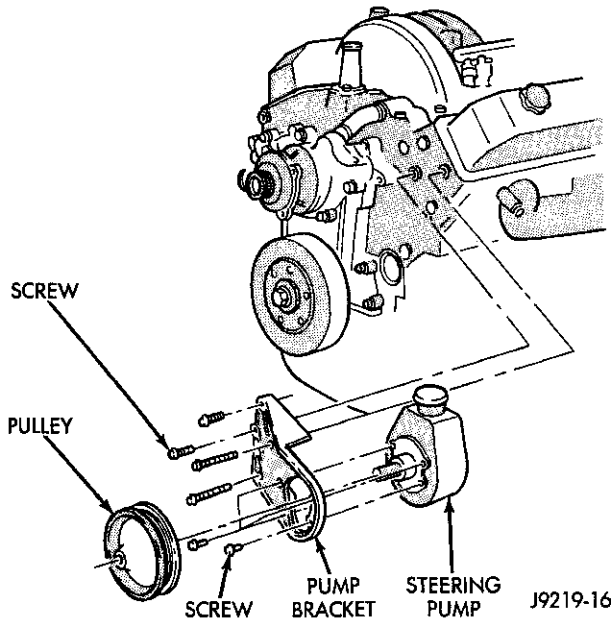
Pump Mounting 3.9L, 5.2L and 5.9L
